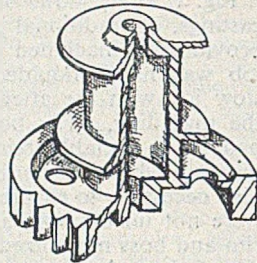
Mould Assembly for the Simplified V-belt Pulley shown in Fig. 2.
